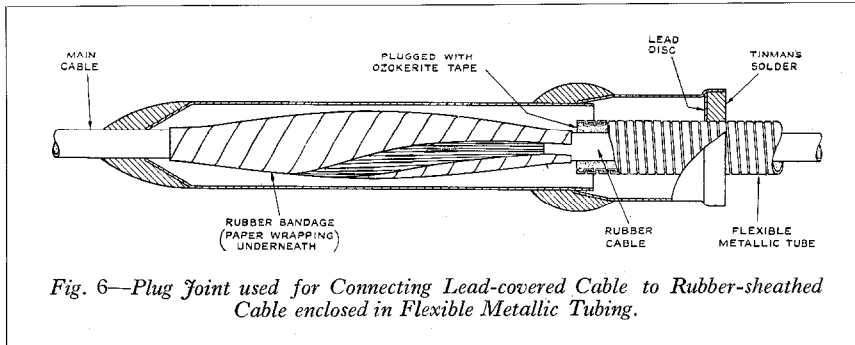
Plug Joint used for Connecting Lead-covered Cable to Rubber-sheathed Cable enclosed in Flexible Metallic Tubing.
